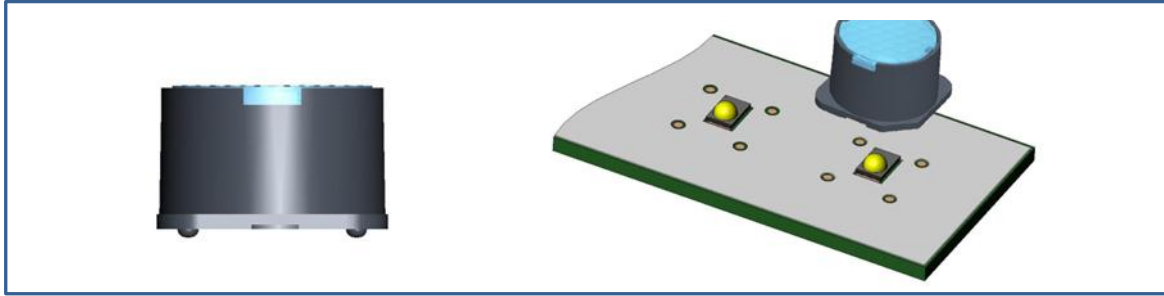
Views of the FLT assembly and the assembly with a PCB showing assembly alignment pins and corresponding recesses in the PCB.
